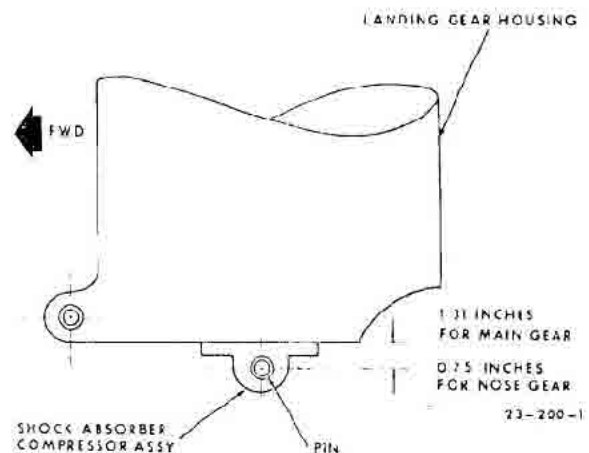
Measurement Gear Housing to Pin With New Biscuits Installed
